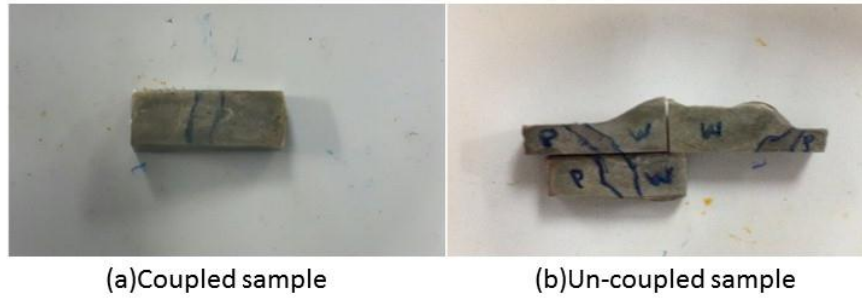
Samples obtained from the weld segment sectioning. (a) Coupled sample.
